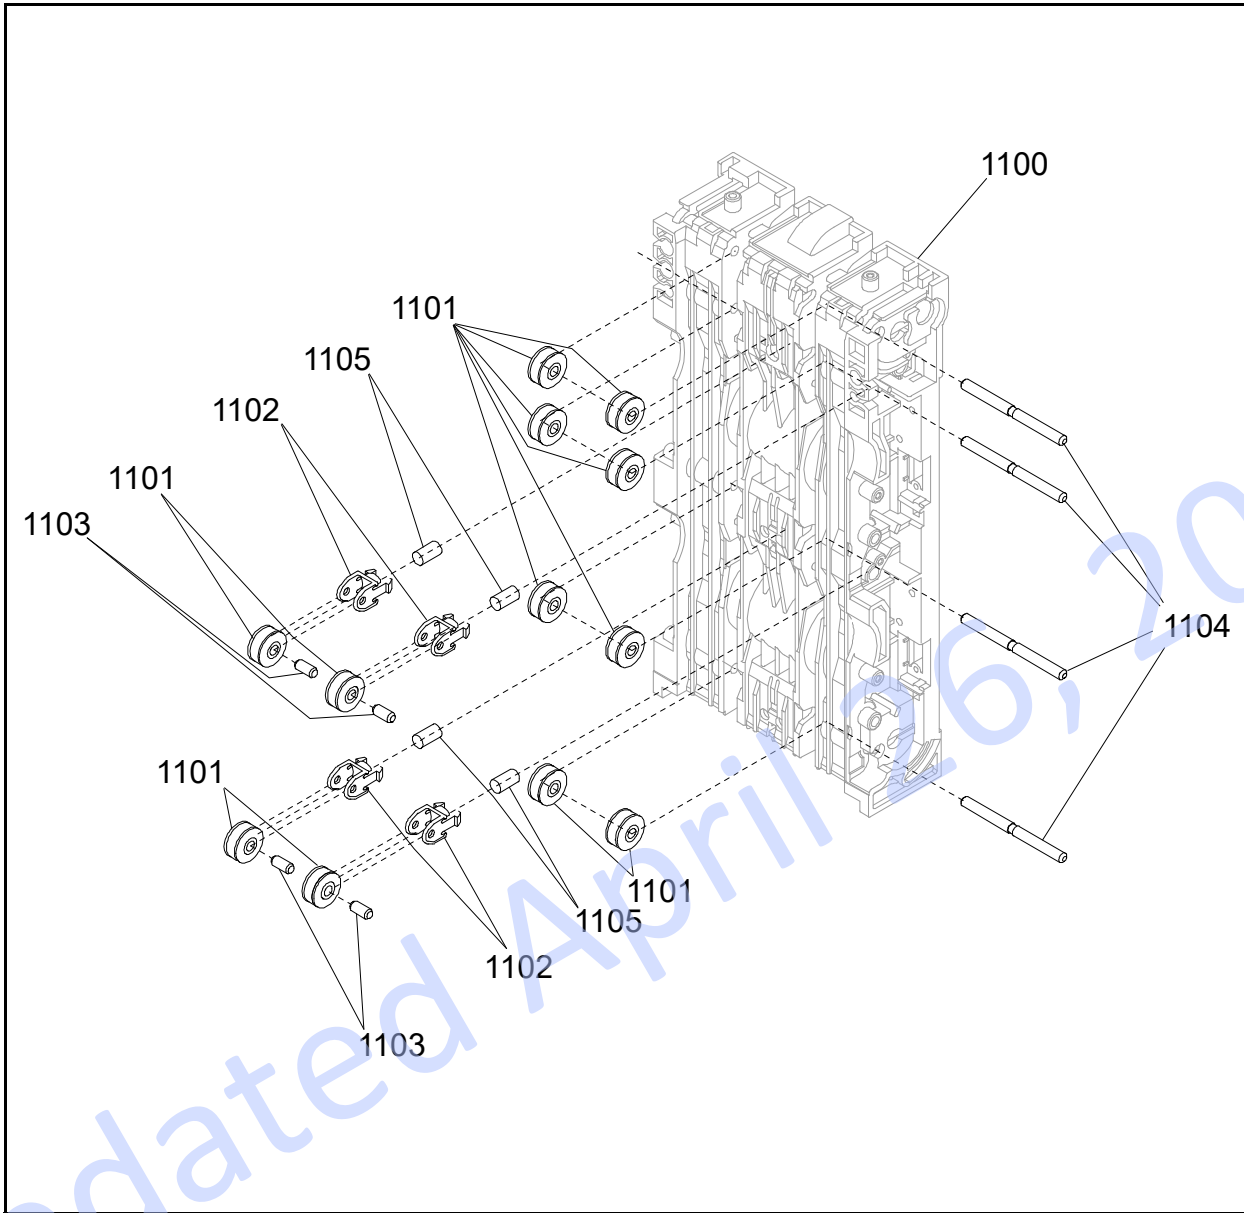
iPRO-RC Rear Transport Assembly 1 Exploded View
